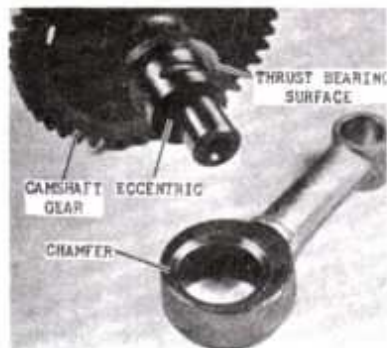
View of early type oil pump used on Models VH70, VM70 and VM80. Chamfered face of drive collar should be towards camshaft gear.
